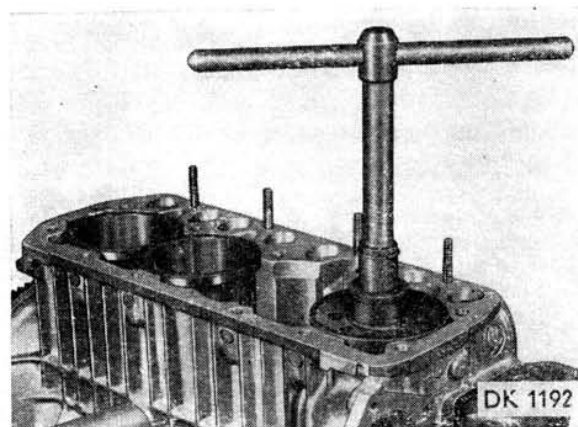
/2 - Dressing Mating Surfaces of Recess for Cylinder Liners Using MP 1-106 Dresser
